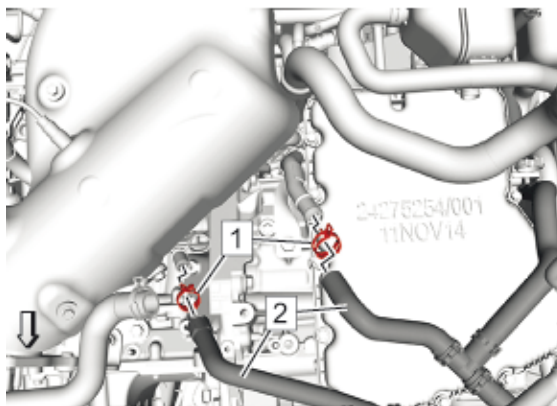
Heater Water Auxiliary Pump Inlet Hoses And Clamps
